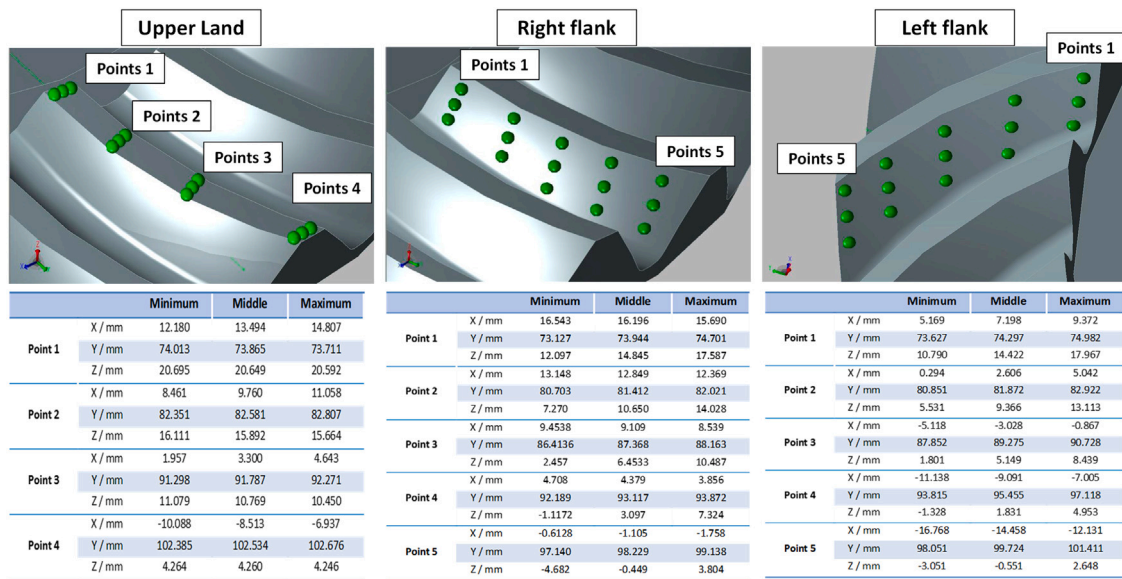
Inspection points. On each of the inspected parts of the gear tooth, a set of inspection points was selected; from left to right: upper land, Right flank, and Left flank. On the flat upper land it was selected  $n = 3 \times 4$  inspection points (green), while on the curved parts of the left and right flanks we increased it to  $n = 3 \times 5$  points. Bottom row: the coordinates of the corresponding sets of inspection points. (For interpretation of the references to color in this figure legend, the reader is referred to the web version of this article.)
